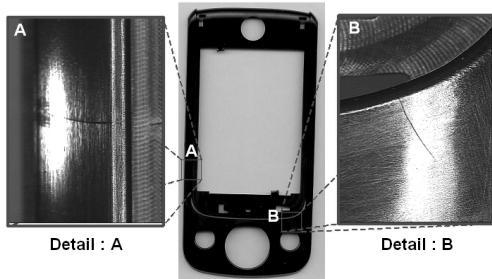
Enlarged photographs of weldlines (mold temperature: 100°C).
